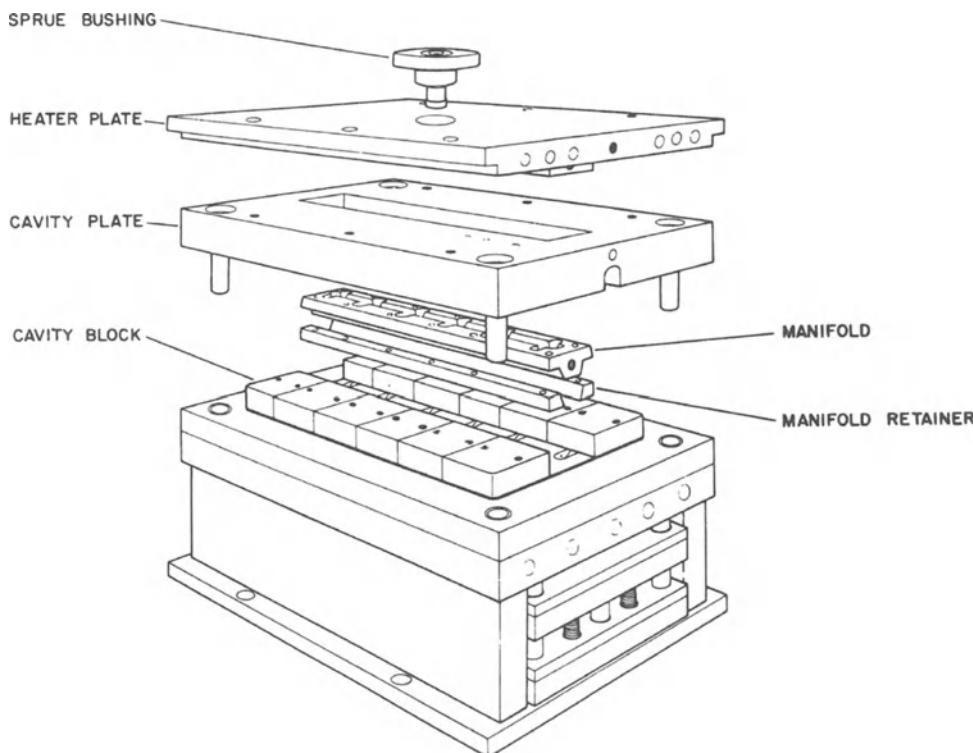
Expanded view of a cold-runner manifold for TS plastic injection molding.
